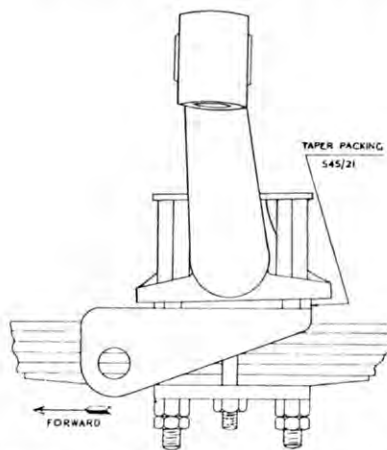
Commencing at TC 4251, tapered packing was inserted between axle & spring to reduce caster. Recommended for all TCs, but not TA or TB. Thick end of packing must face rear of car, as shown.
